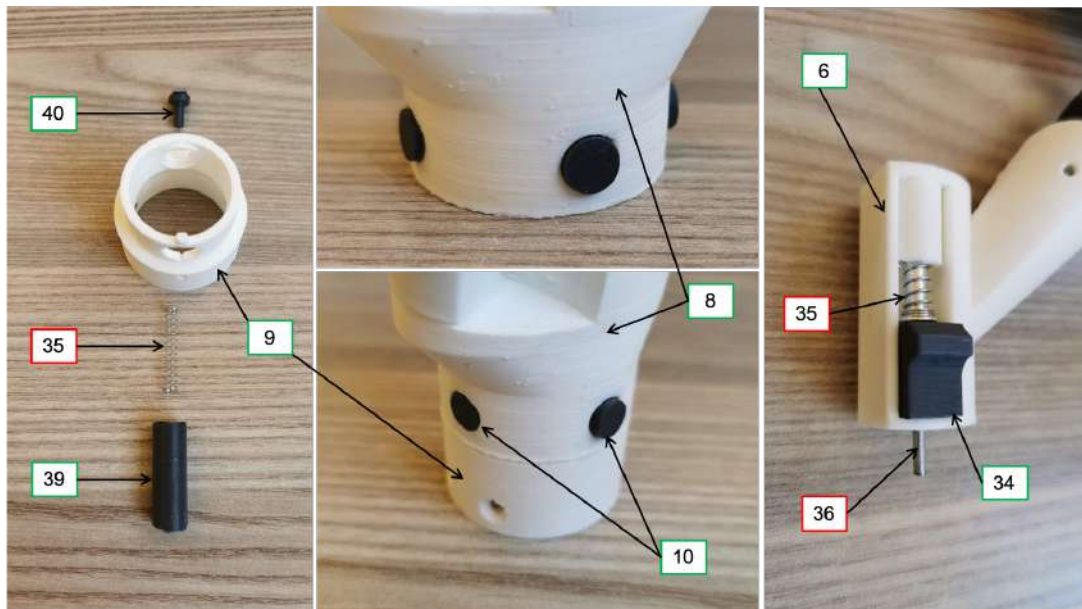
Labelled views of the wrist and thumb mechanism components.
